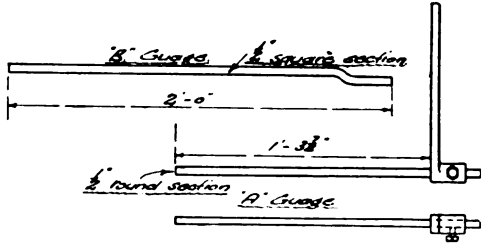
GAUGES USED FOR MARKING OFF CRANKS.
